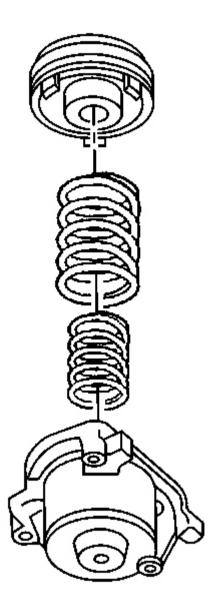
1-2 Accumulator Inner & Outer Springs Courtesy of GENERAL MOTORS CORP.
